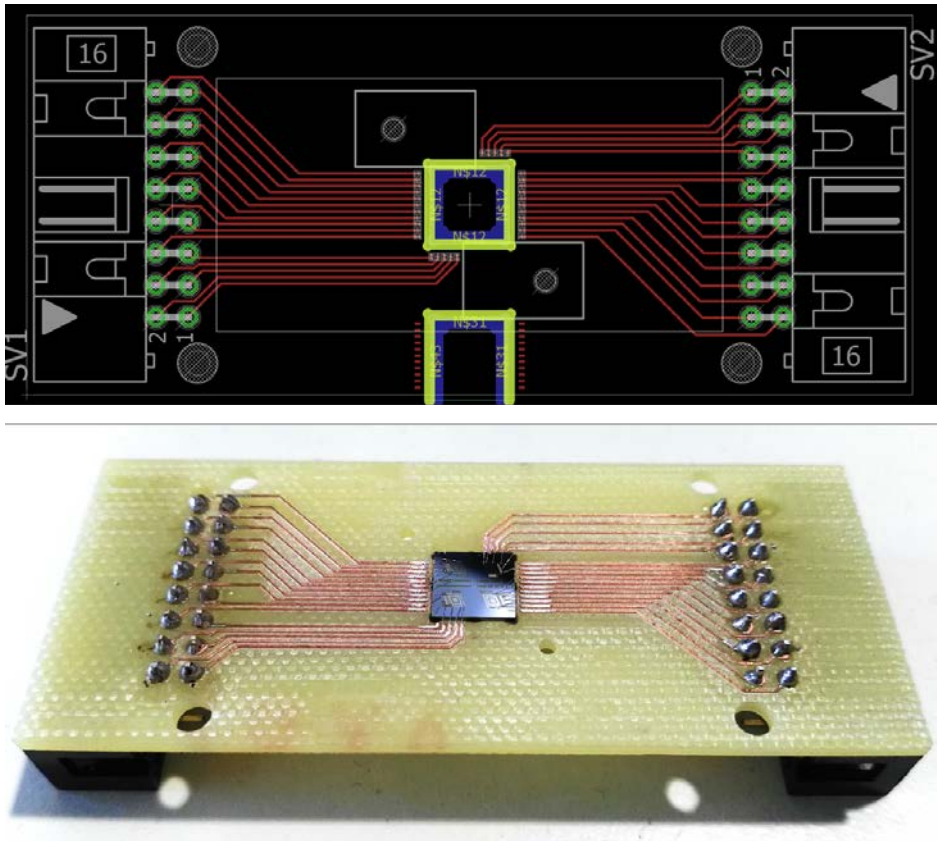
PCB layout designed with Eagle software (top), and image of the μ TEG chip (featuring four devices) placed inside the cavity of the PCB and wire bonded to Cu interconnects on the board (bottom).
